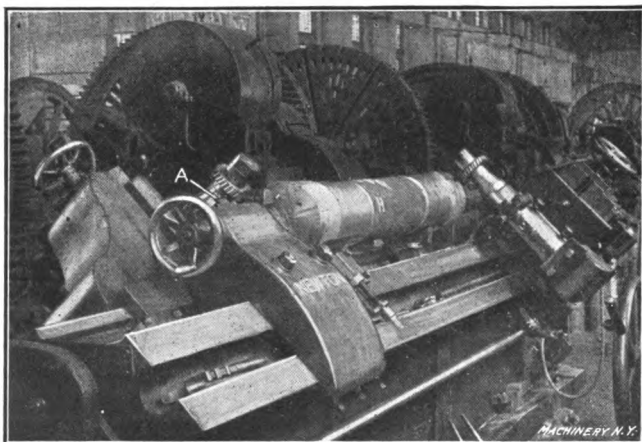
Keyseating the Axles on a Special Quartering Milling Machine
